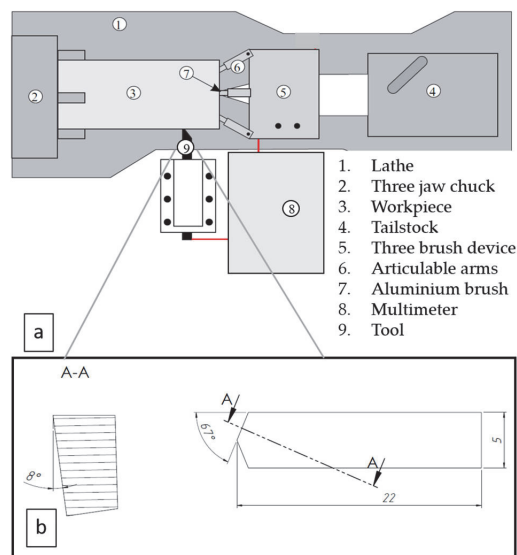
Schematic of the tool-workpiece thermocouple system (a) and cutting tool geometry (b).
